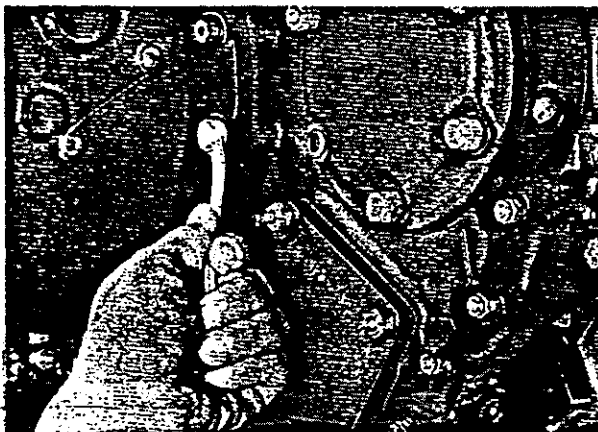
Removing Accessory Drive Gearbox Support Bolts
